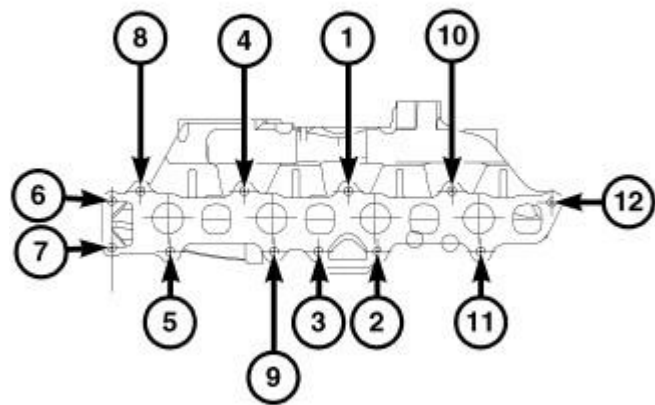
Identifying Manifold Retaining Nuts, Intake Manifold & Intake Manifold Gasket
